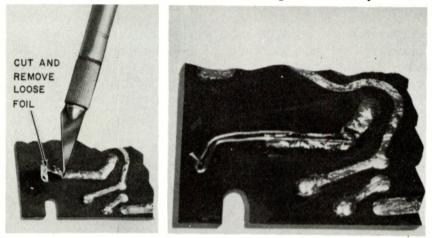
The foil on a printed-circuit board may pull away. When this happens, clip off the raised part and replace it with wire.
